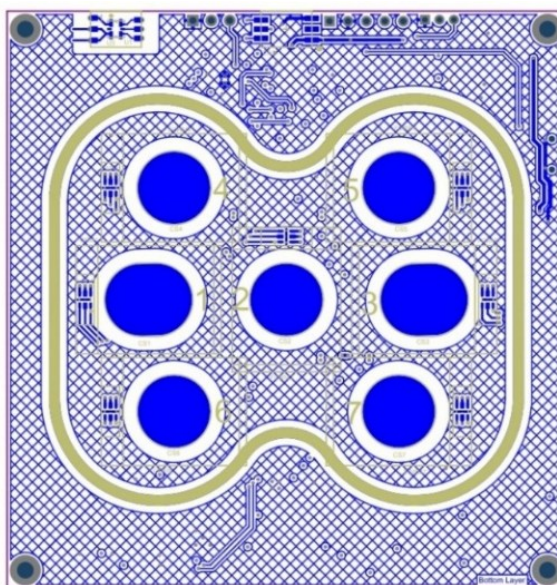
ICT-040X-04A PCB (Bottom Layer)
